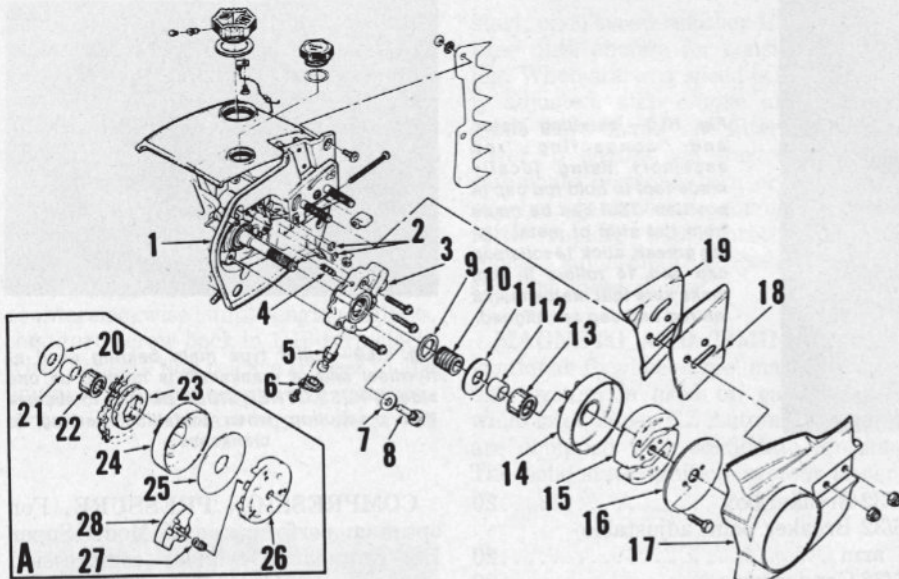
Exploded view of automatic oil pump and clutch assemblies. Inset A shows three-shoe type clutch. Sprocket (23) and clutch drum (24) are integral on some models.
